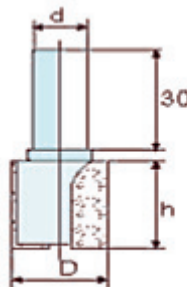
Scheme of grooves moulding on upperspindle moulding machine or CNC
